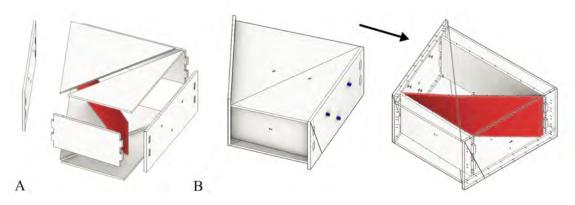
(A) Exploded view of a box (B) Box with dowels and engraved (C) Box with screws
